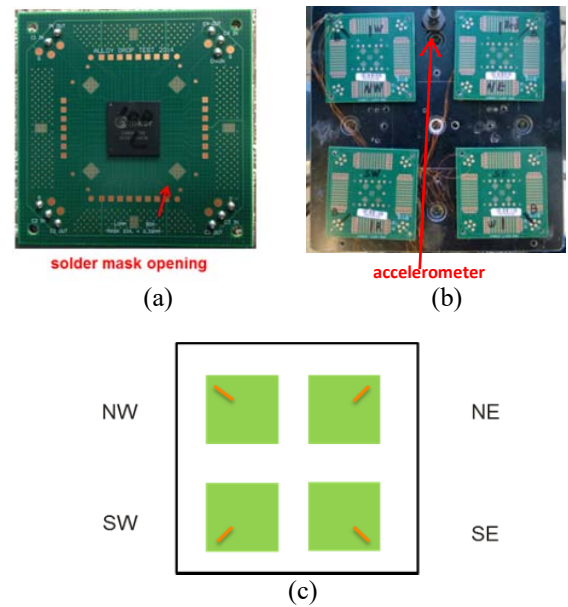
(a) Solder mask opening for attaching strain gage, (b) four boards mounted on table with table accelerometer location indicated and (c) board location identifiers
